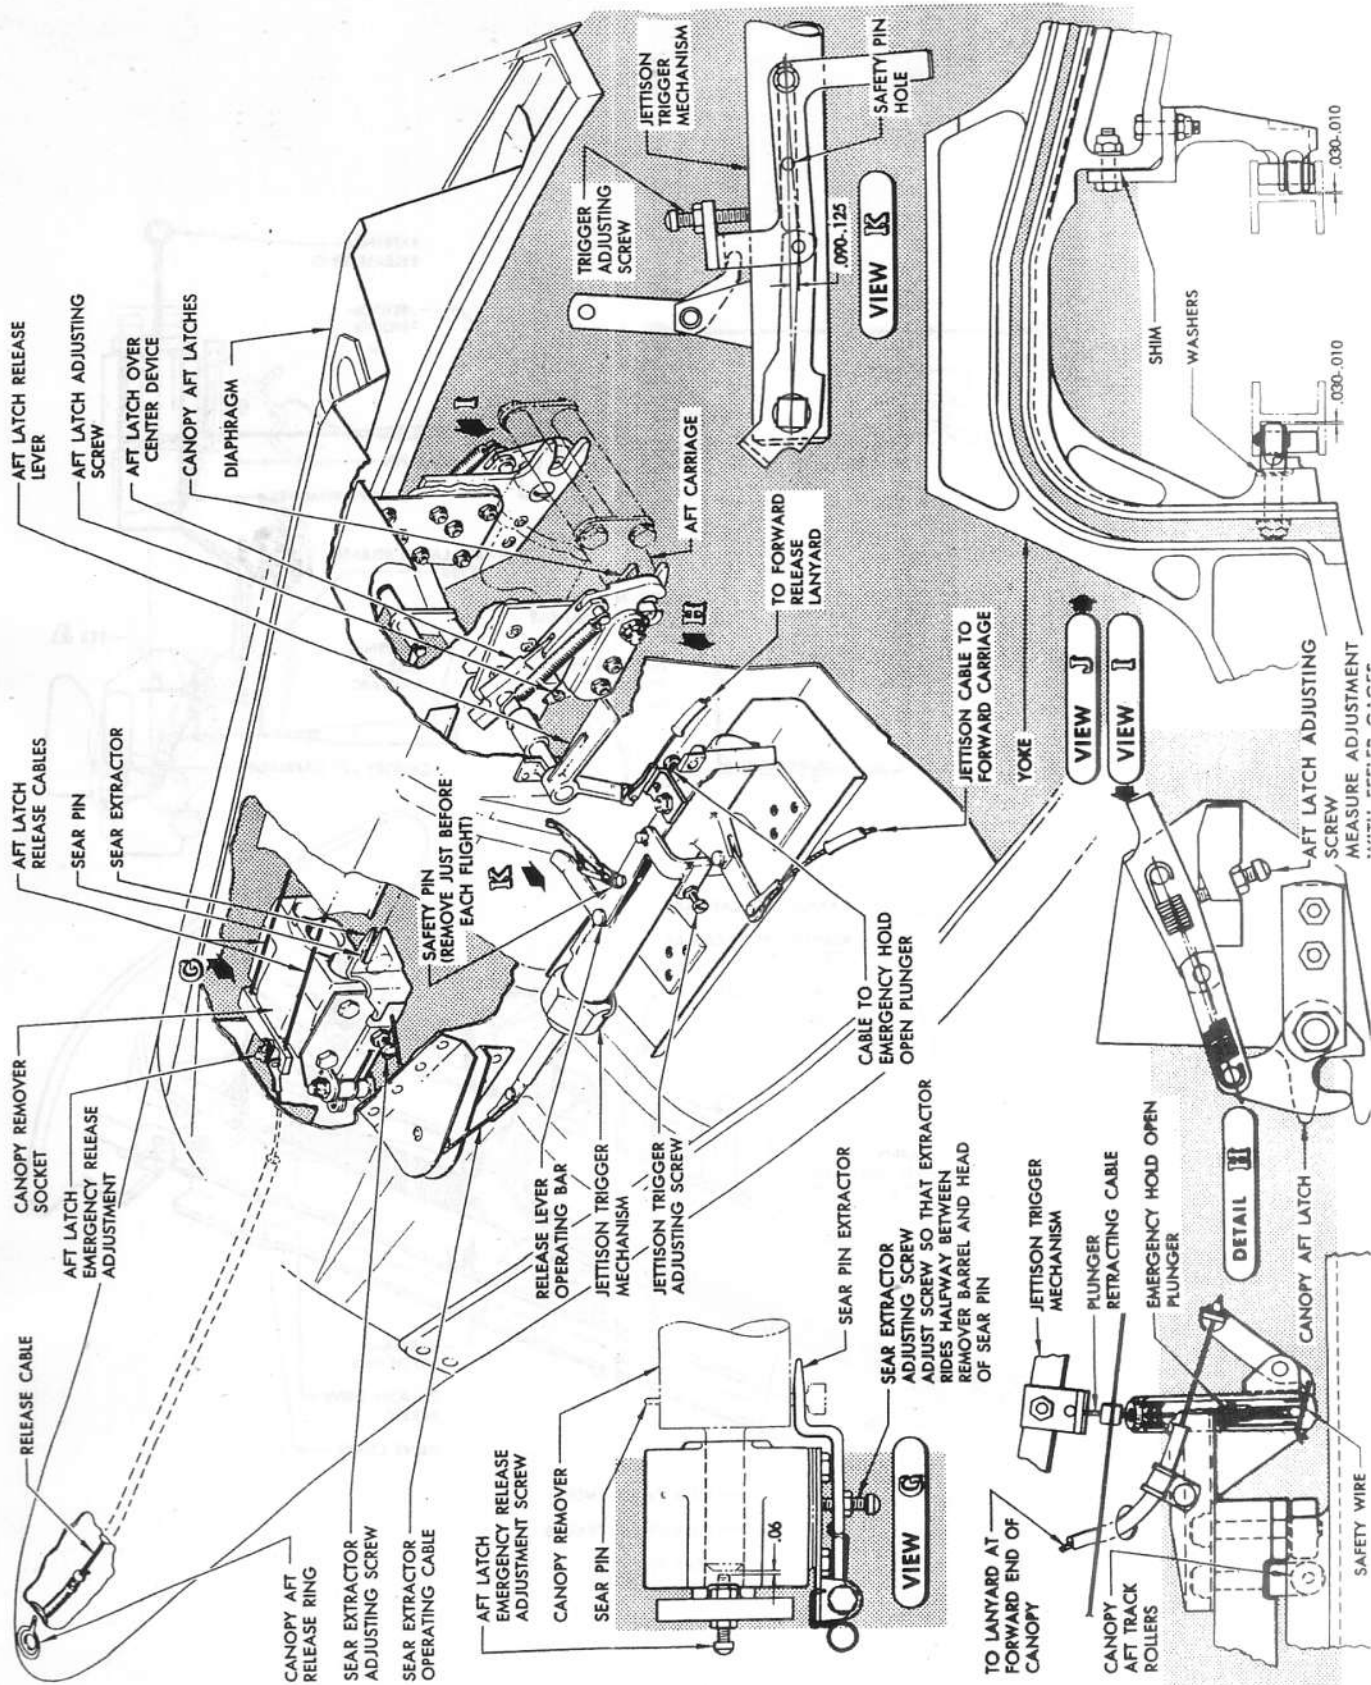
A (Sheet 2 of 3 Sheets) — Canopy Jettison and Electrical Operating Mechanism
